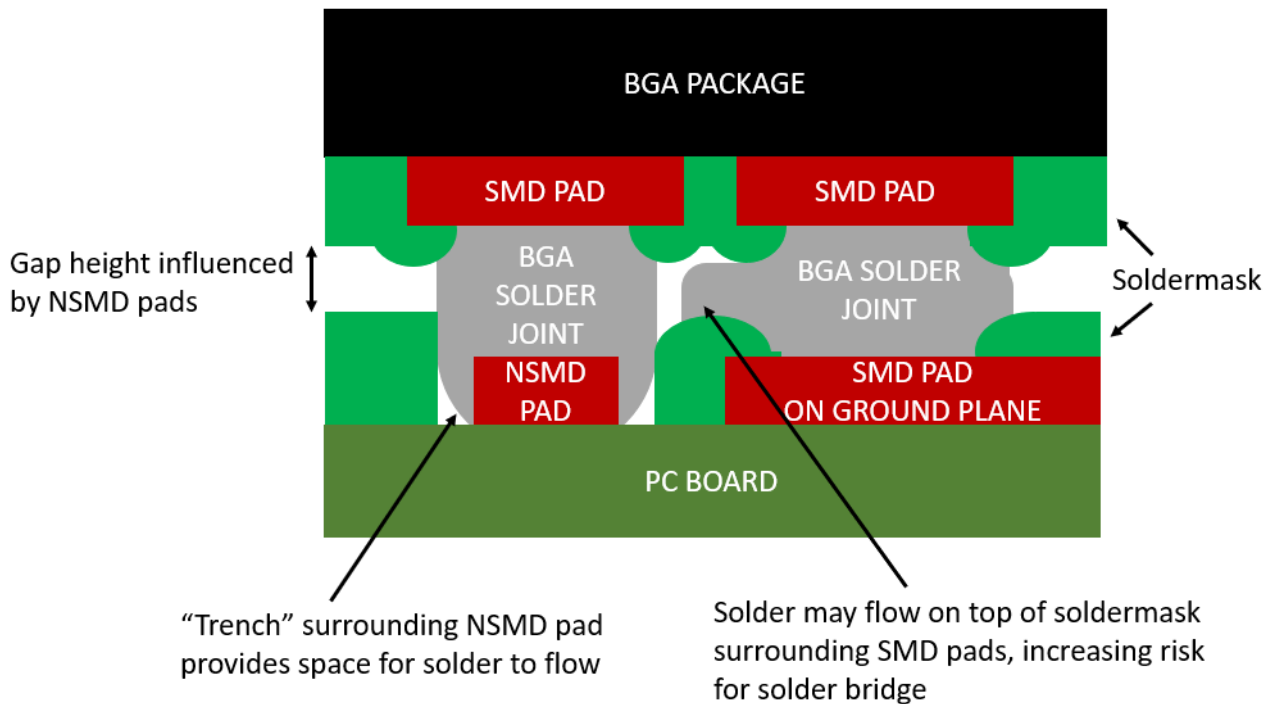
Illustration of solder "squeeze-out" with SMD pad design
